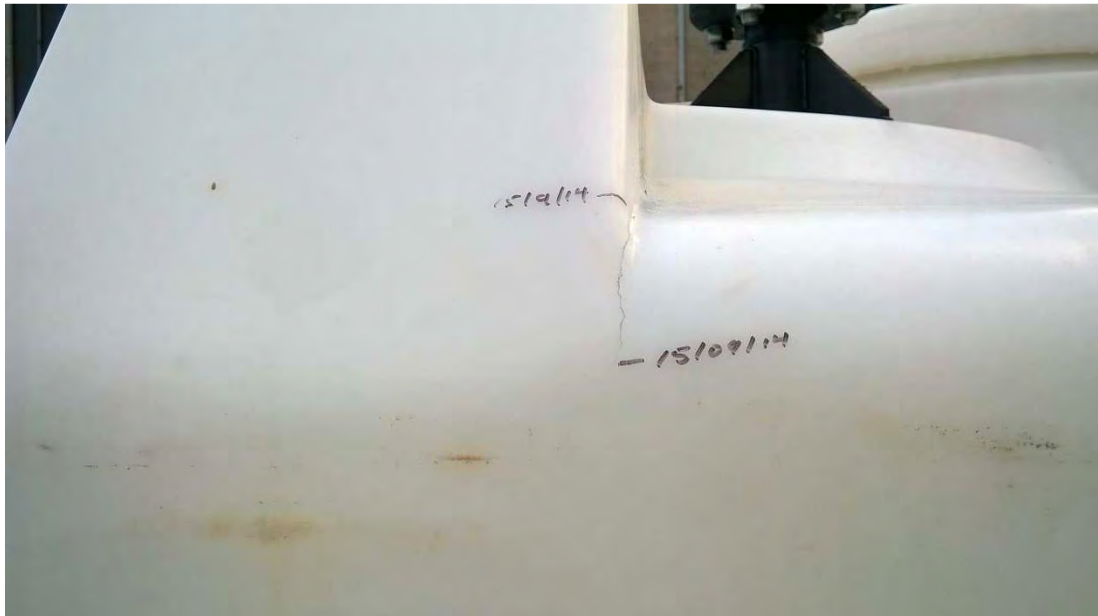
Acetic Acid – Crack in primary tank wall
